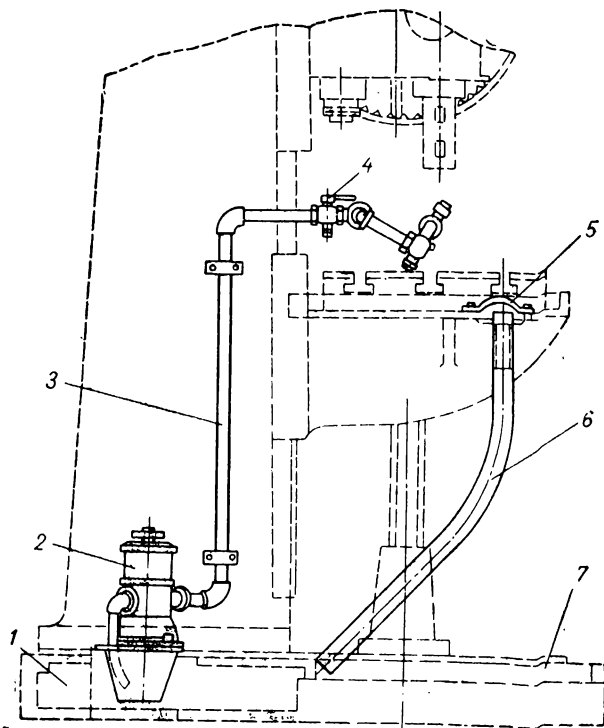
Coolant system of the upright drilling machine, model 2A135
